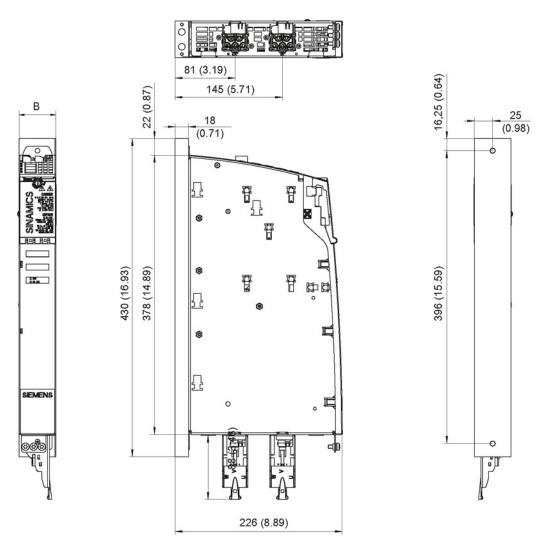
Dimension drawing of 3 A to 18 A and 2 x 3 A to 2 x 9 A Motor Modules Booksize with cold plate, all dimensions in mm and (inches); example: 2 x 5 A Double Motor Module
